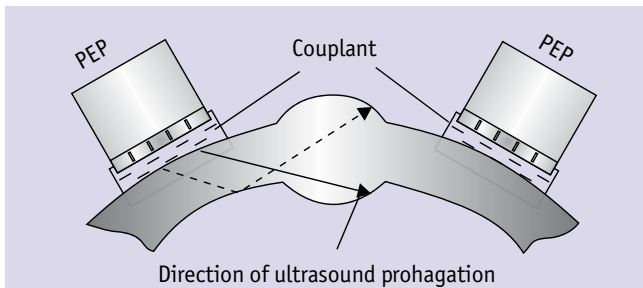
Weld inspection with the use of piezoelectric probes.
